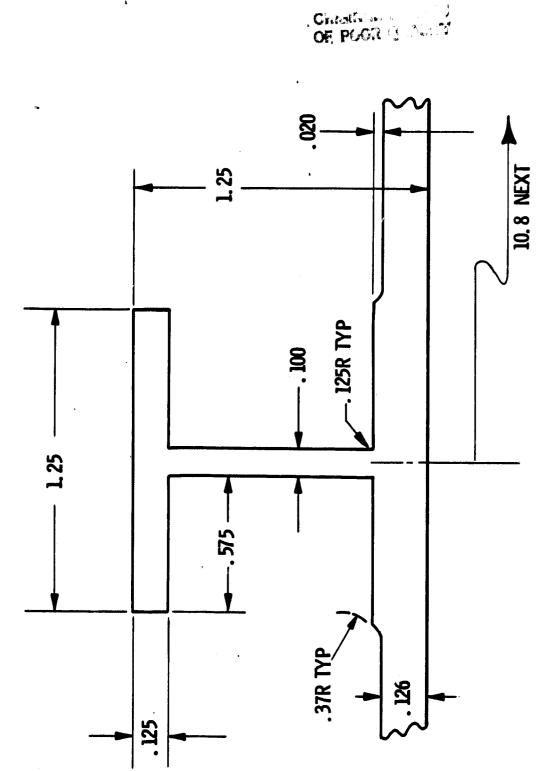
Section View of T-Rib Reinforcement of Fuel Tank Panel
